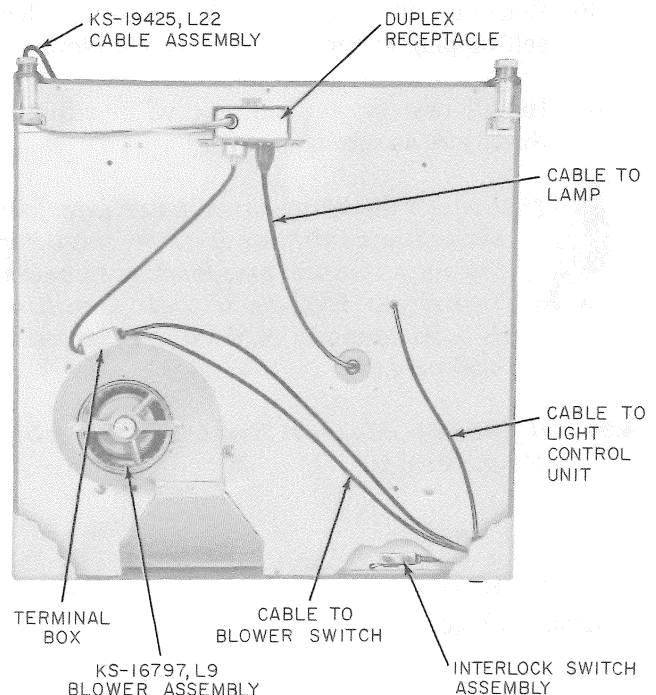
KS-16797, List 9 (MD) Blower Assembly Installed
